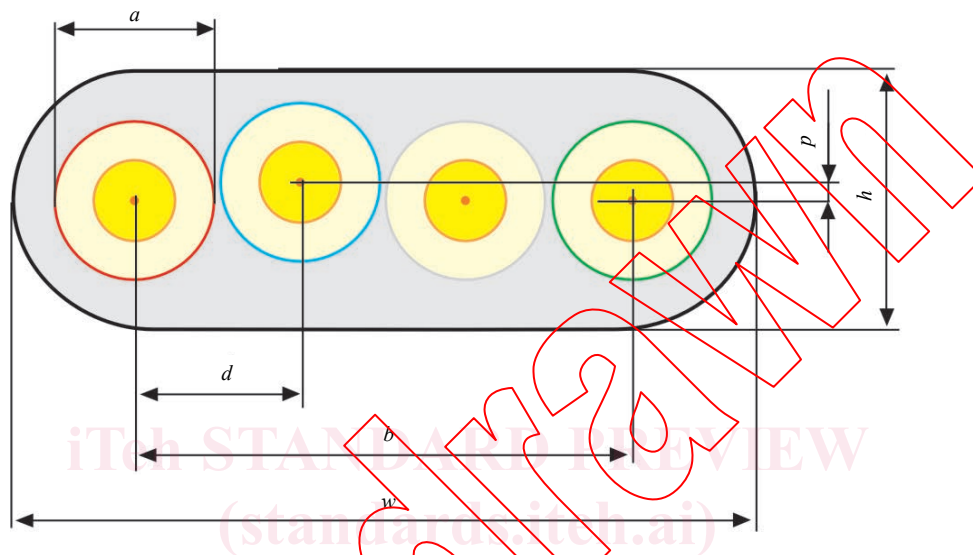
Cross-sectional drawing illustrating fibre ribbon geometry
